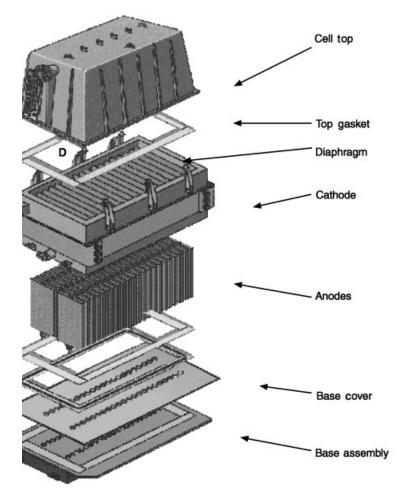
Exploded view of an ELTECH MDC-55 cell.
